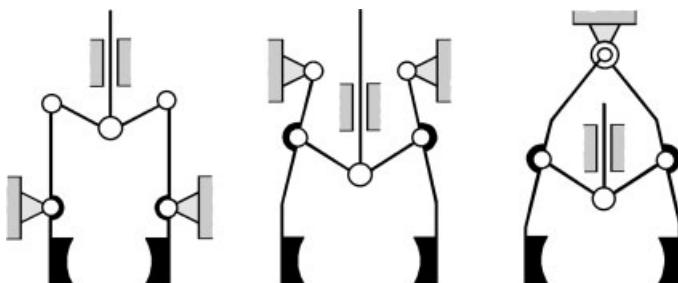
Kinematics of an angular gripper with 5 rotary and 1 linear joints
